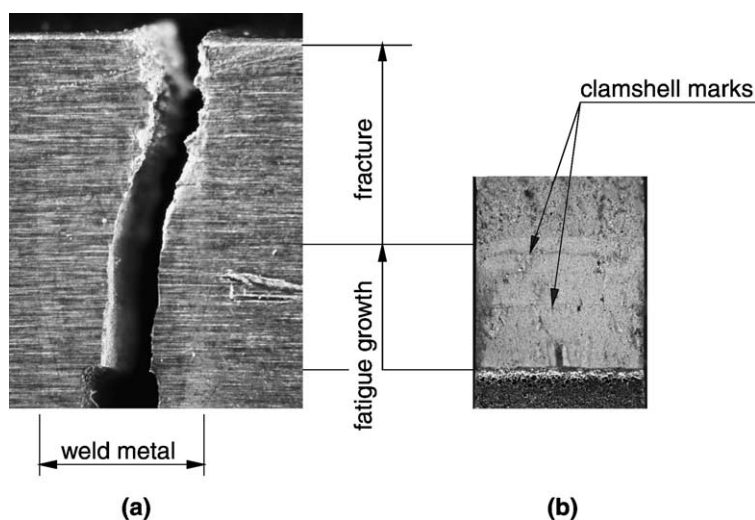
Crack path (a) and crack surface (b) of a welded SENB specimen.
